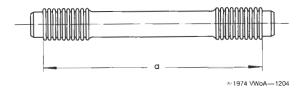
Pushrod tube length (a). Check for cracks and pinholes.
